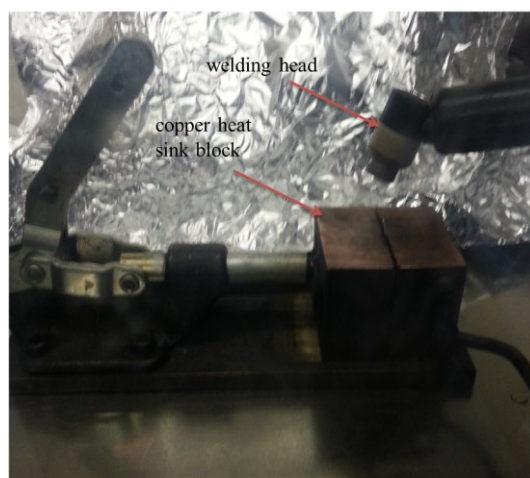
Welding head and copper heat sink block used for welding during the preparation of ARC samples.
